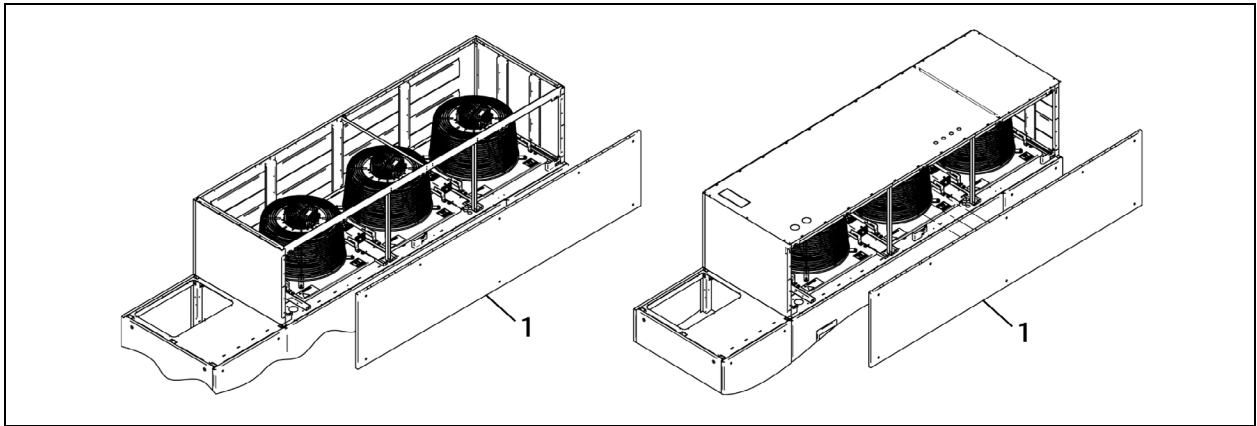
Rear Discharge Top Panel Assembly and Attachment
